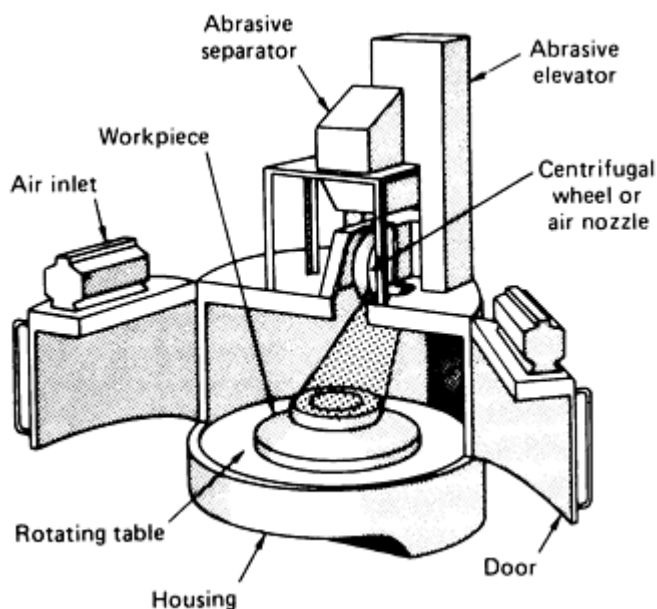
Table-type blast cleaning machine. The centrifugal wheel propels the abrasive particles.
